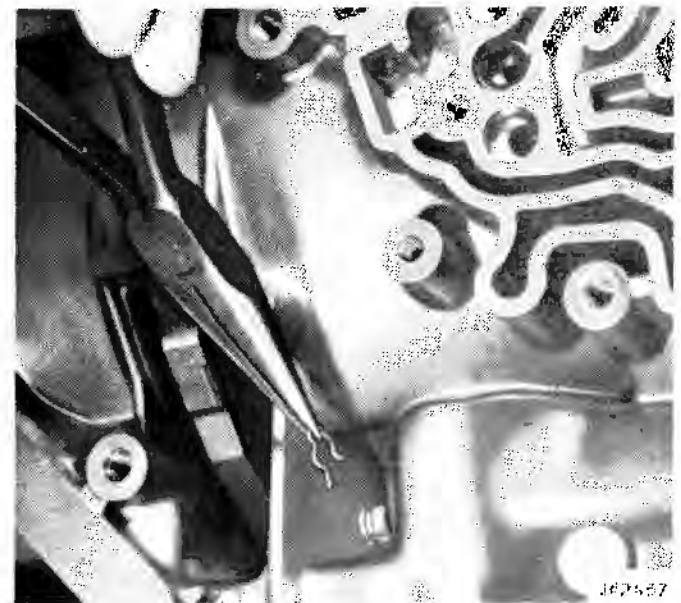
Removing-Installing Retainer Spring From Parking Pawl Shaft
